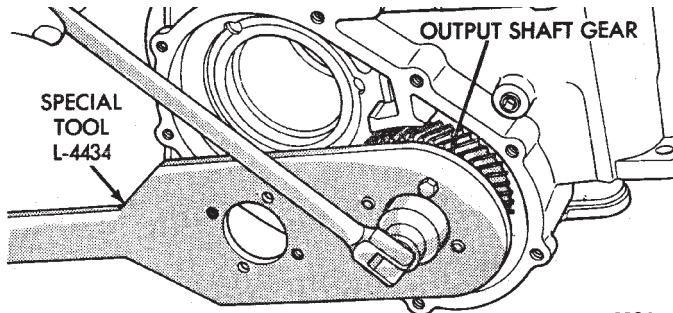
Remove Output Shaft Retaining Nut and Washer
